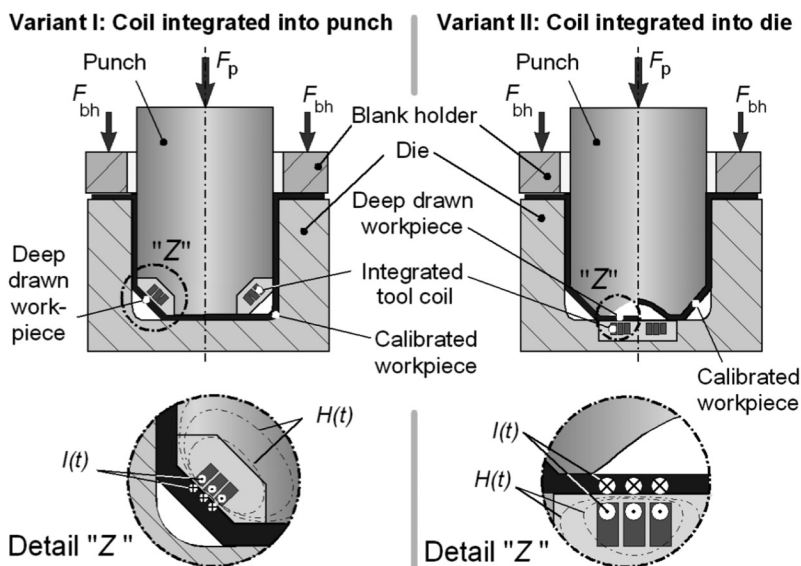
Combined deep drawing and electromagnetic sheet metal forming. Source: Ref 11.73
